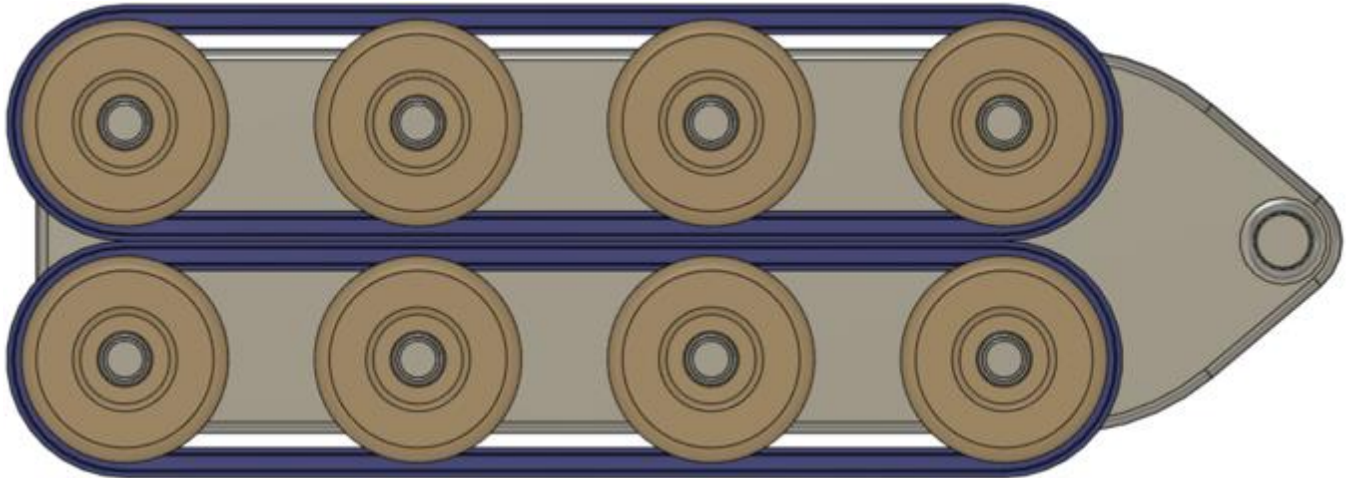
(top) & 42 (bottom): Mark 3 gear-belt drivetrain prototype module, and a flat-belt, flanged-pulley mockup.
